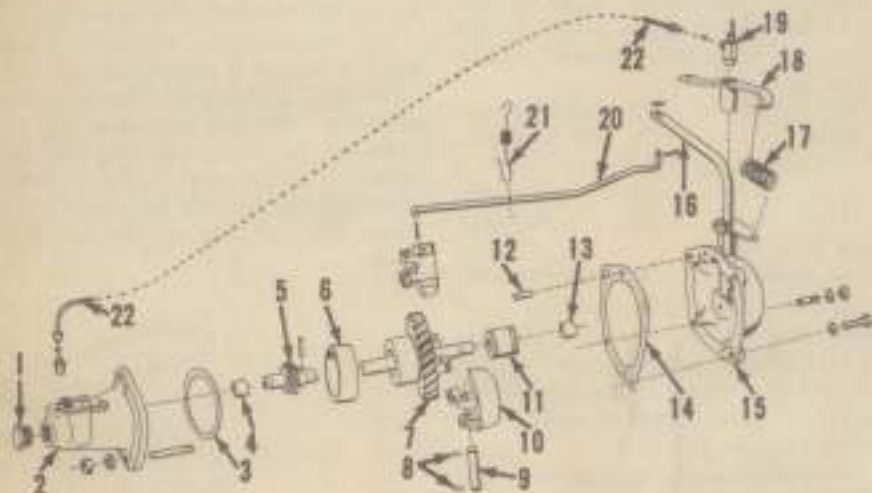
Exploded view of D-14 governor and ignition distributor drive assembly. The drive shaft rides in three bushings (4, 6 and 13). D-15 non-diesel governor is similar.
